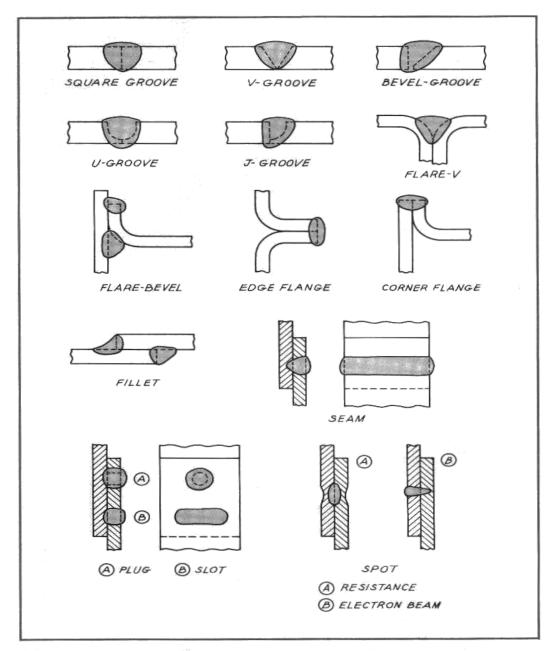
Types of welds. These basic types may be intermixed on a single part if desired.
